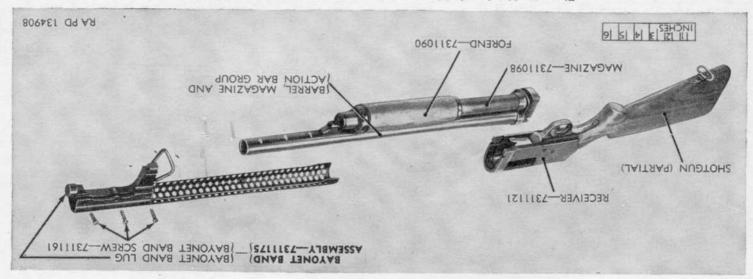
Muzzle end of Stevens sholgun M520-30-partially exploded view.
